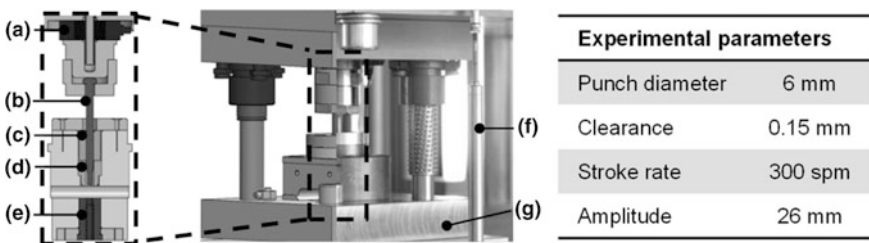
Experimental setup of the hole stamping tool. a Force measuring ring Kistler 9051A, b punch, c guidance, d stripper, e die, f inductive displacement transducer HBM WA/100, g bottom tool plate, according to [19]
